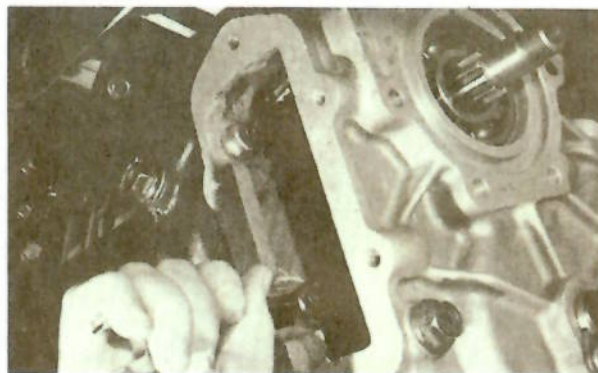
REMOVING AN INSIDE BOLT FROM THE POWER TAKE-OFF COVER HOLE.
